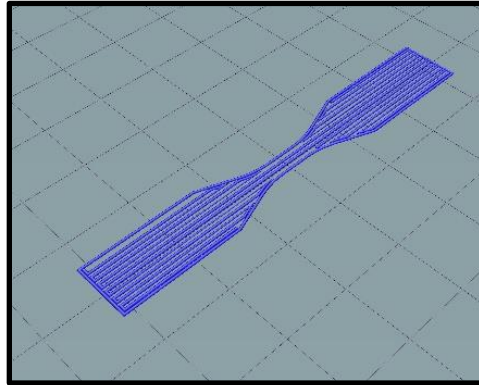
CAD drawing of ASTM D638 Type V dogbone
